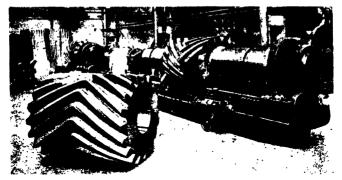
D.B.S. End Milling Machines for Cutting Rolling
